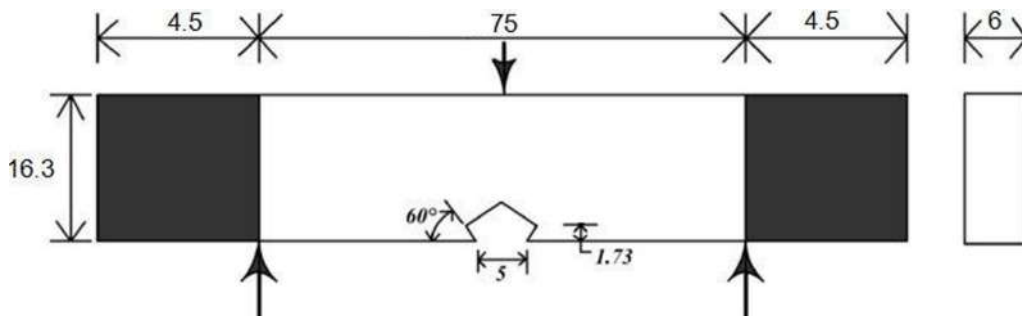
3-POINT BEND FATIGUE SPECIMEN (DIMENSIONS IN mm)
